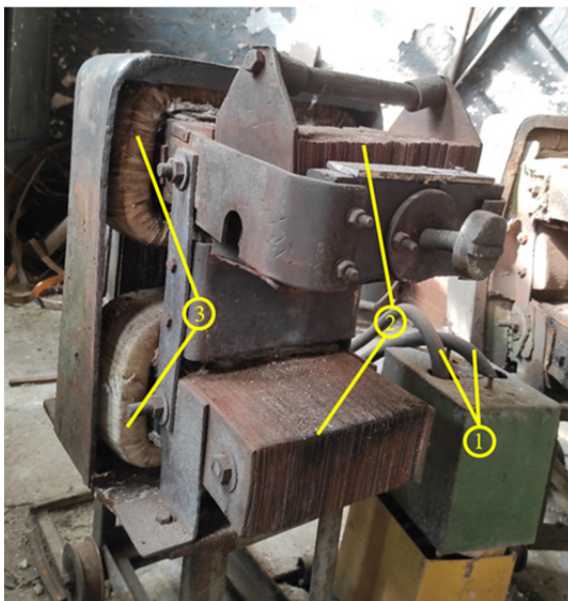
Induction heater: 1 – power cable; 2 – magnetic conductor; 3 – windings.
